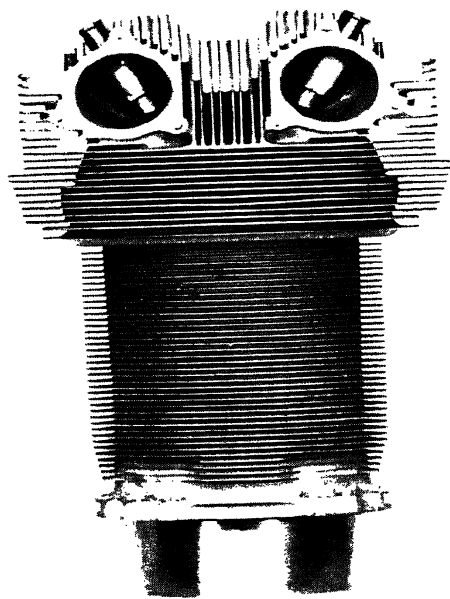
The complete cylinder and head of Bristol "Mercury" and "Pegasus" engines.
